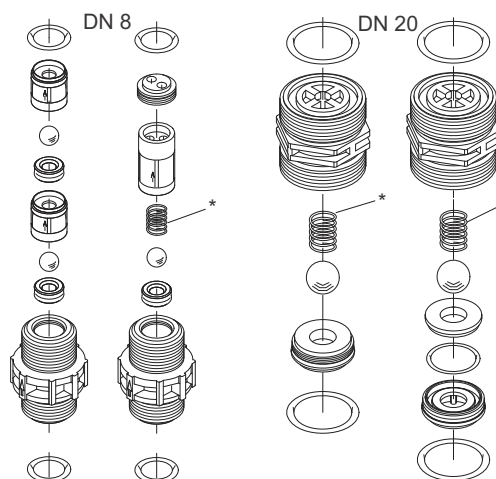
Stainless-steel or plastic valve DN 8 / DN 20, \* spring-loaded as an option
